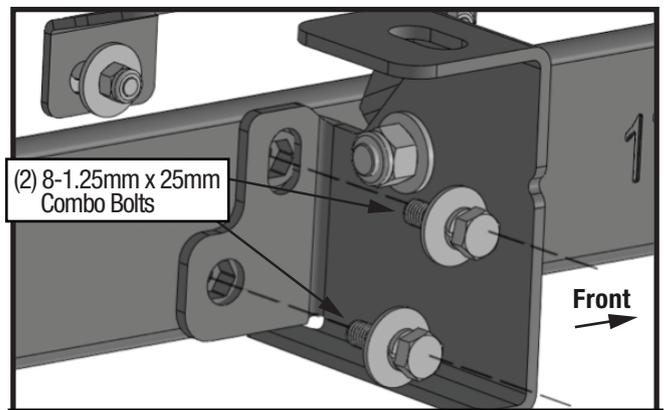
Attach Driver/Left Rear Support Bracket [H] to Driver/Left Rear Mounting Bracket [C]
